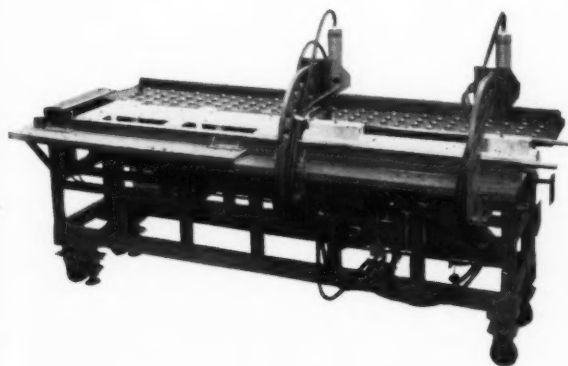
Shown in this photograph is a pneumatically controlled pre-bend and loading machine which is used to form sheet steel before it is fed into a power press. The sheet steel is loaded on to a shuttle carriage on the left of the machine by the operator. It is then automatically passed to the right on to the bending platform
